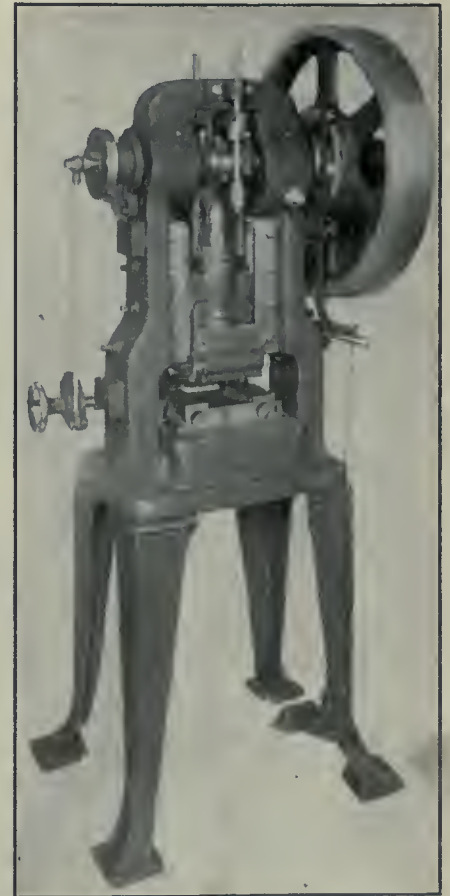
SPECIAL DOUBLE ACTING SINGLE CAM PRESS.
